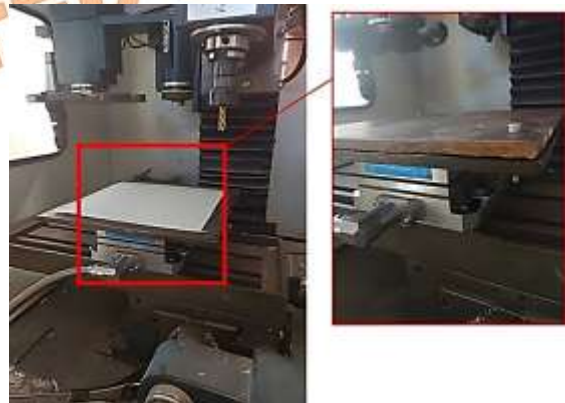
Clamping of Composite Specimen Between Upper and Lower Fixture Plates Using Fastening Bolts
